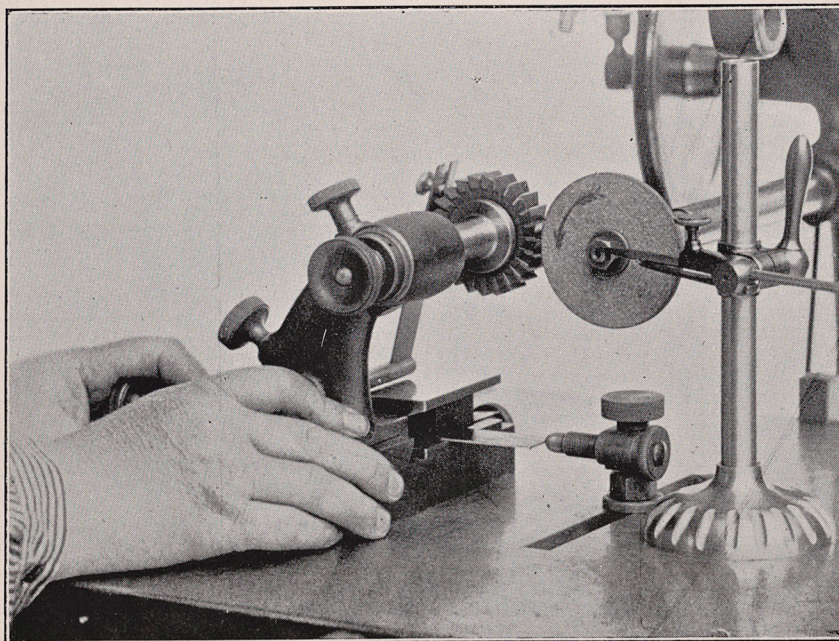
Grinding same cutter as in Fig. 4 and showing way of measuring the clearance.
